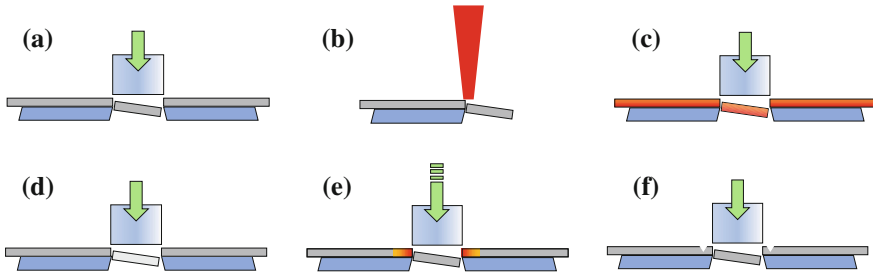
Cutting (trimming, piercing) methods for hot stamped components: a hard cutting, b laser cutting, c hot cutting, d cutting of soft zones, e adiabatic cutting, f cutting with notches [re-created after [7–10]]
